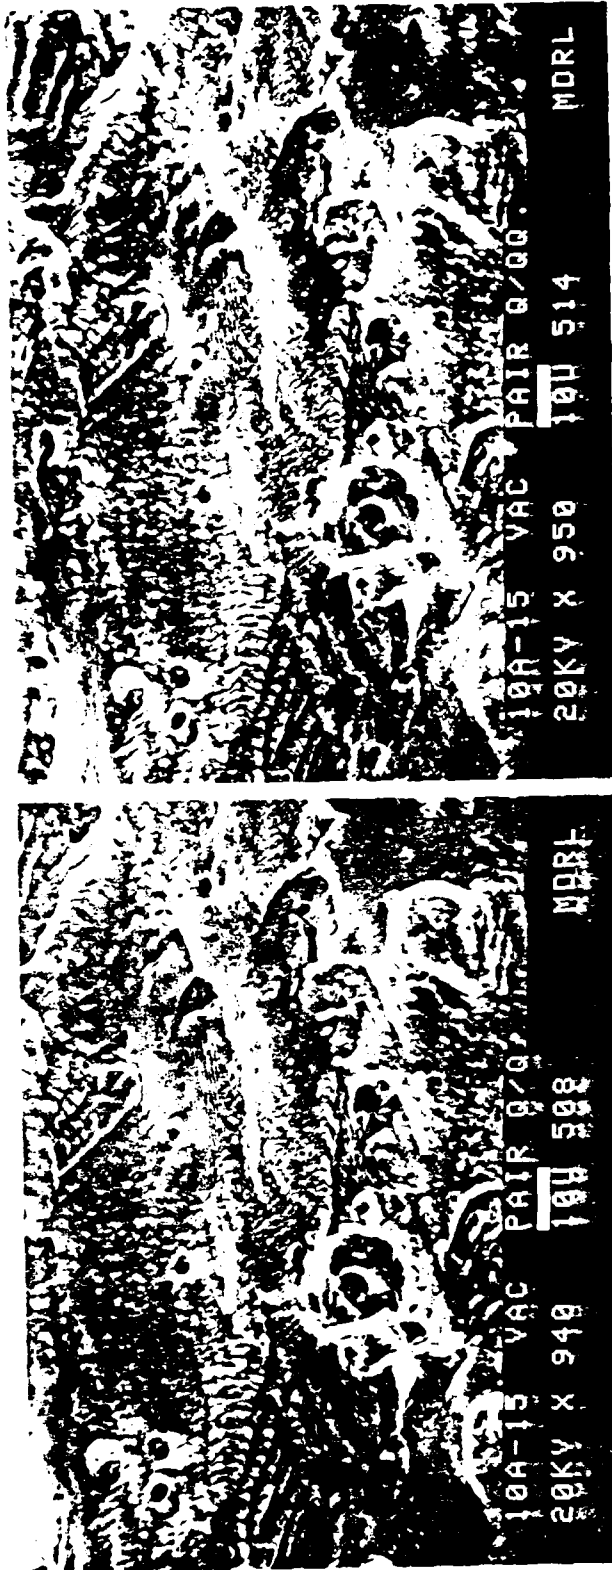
Stereo pair of the fracture surface morphology for 7075-T651 tested in tension. The stereo pair of the mating ball is shown in Fig. 26. 950 X
